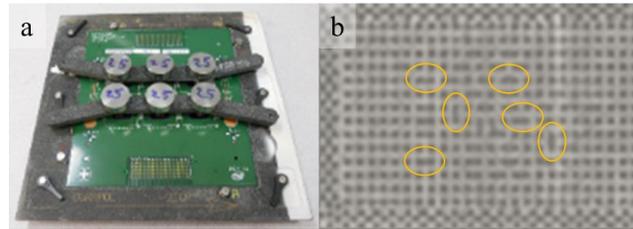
(a) Hammer test setup fixture with weights to compress in the middle of the package to force solder bridging during SMT reflow (b) A few of the bridging defects have been highlighted in a typical X-ray image in the center of the package post SMT.
